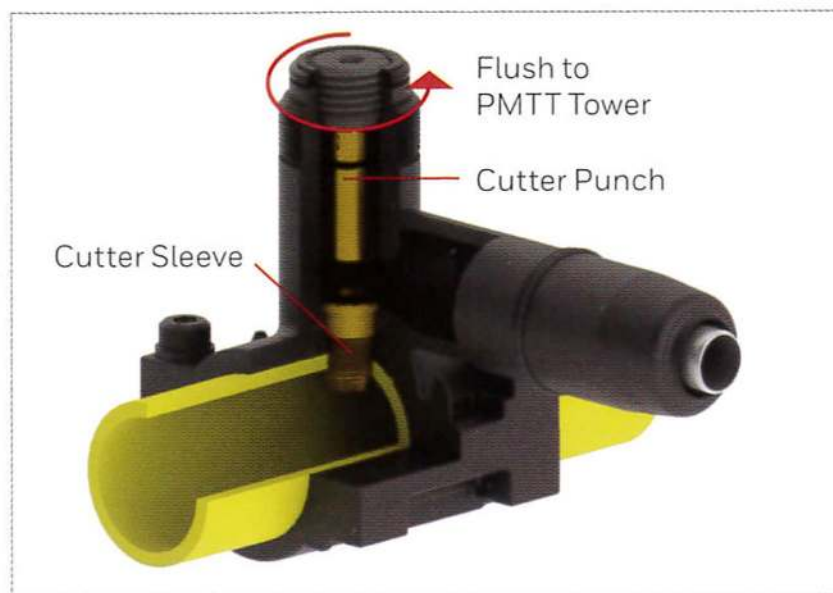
Service Gasified – Cutter Punch retracted, Cutter Sleeve remains engaged with (PE) Main
